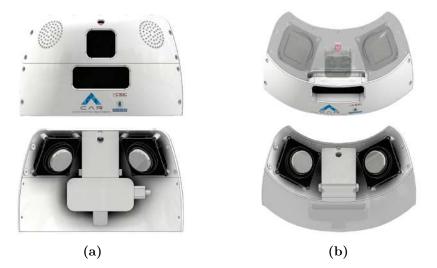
Details of the front panels: (a) Front and back views, (b) Assembly details.
